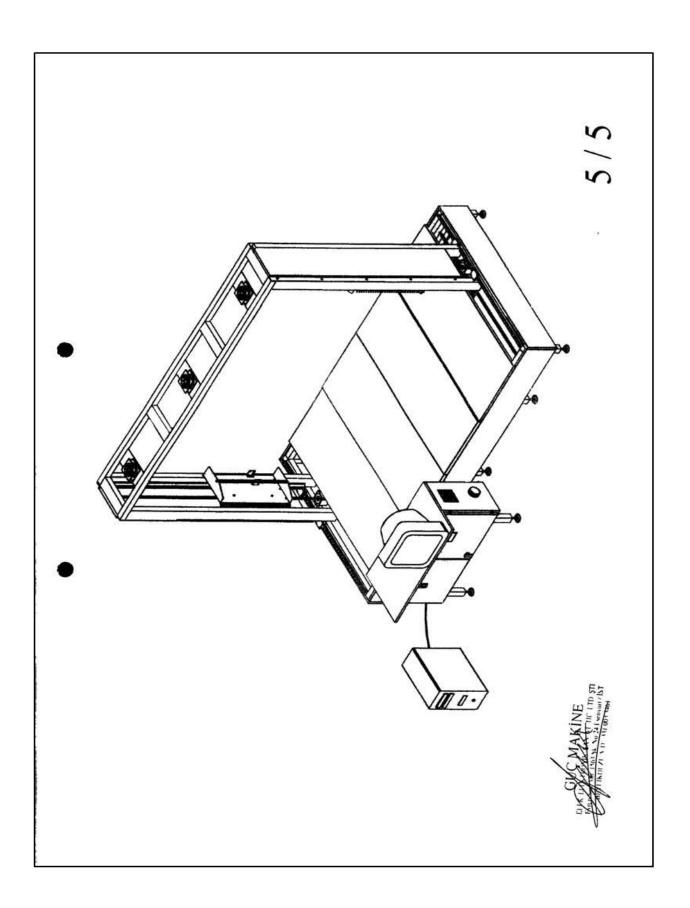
2007/04961 'Method of Producing Test Components by a Hot Wire Cutter'[Z]
